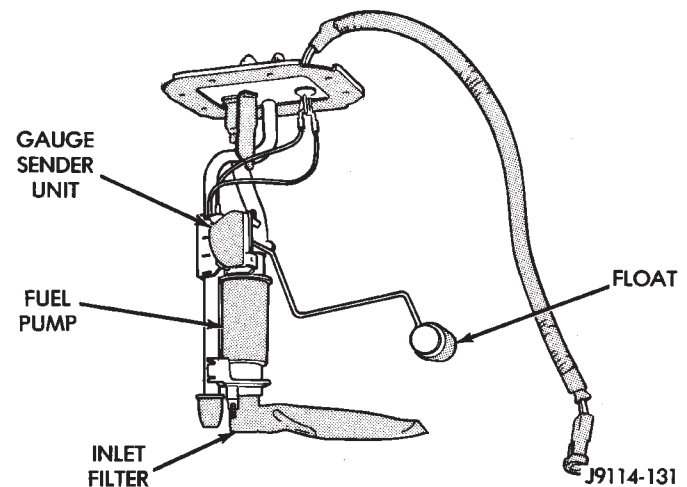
Fuel Pump Module—Remove/Install—YJ Models
